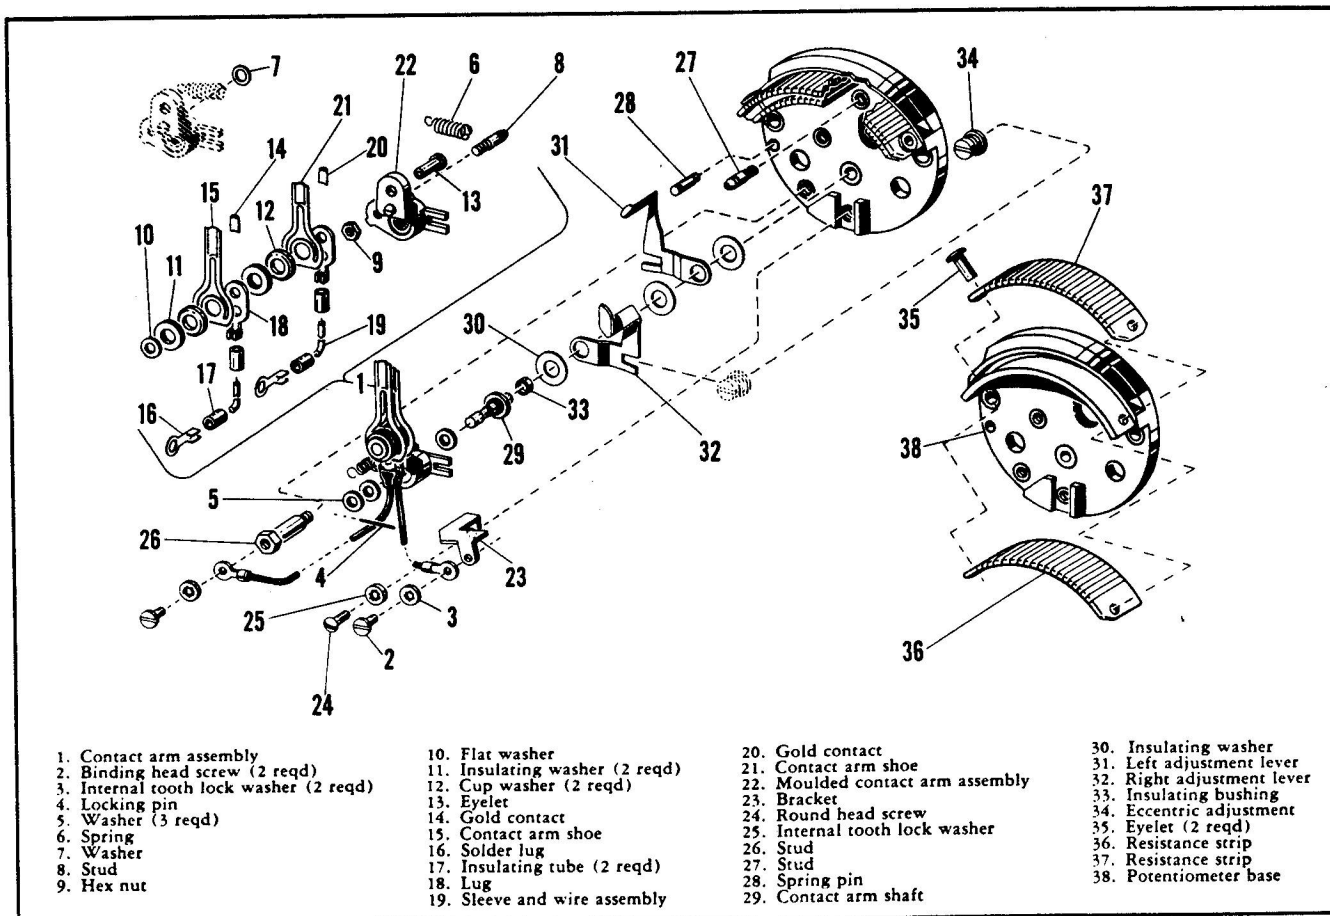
B. Exploded View of Typical Flexible Contact Arm Lead Type Potentiometer Having Two Resistance Strips
